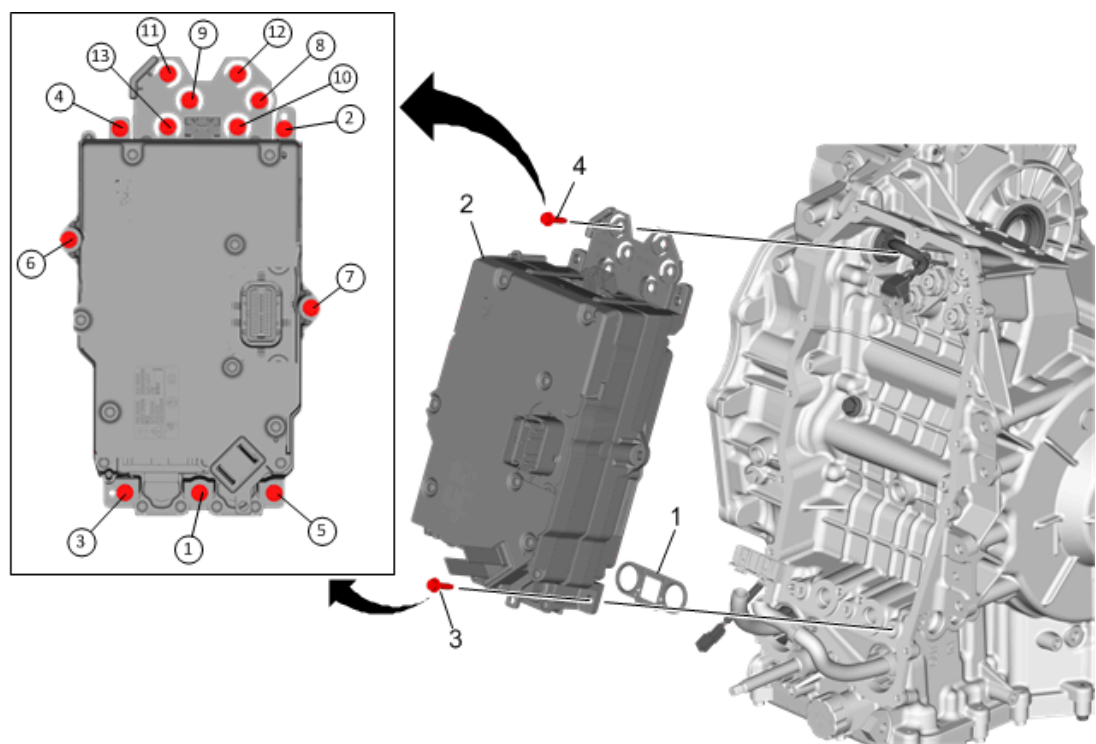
Drive Motor Power Inverter Module (With Bolt Tightening Sequence)
